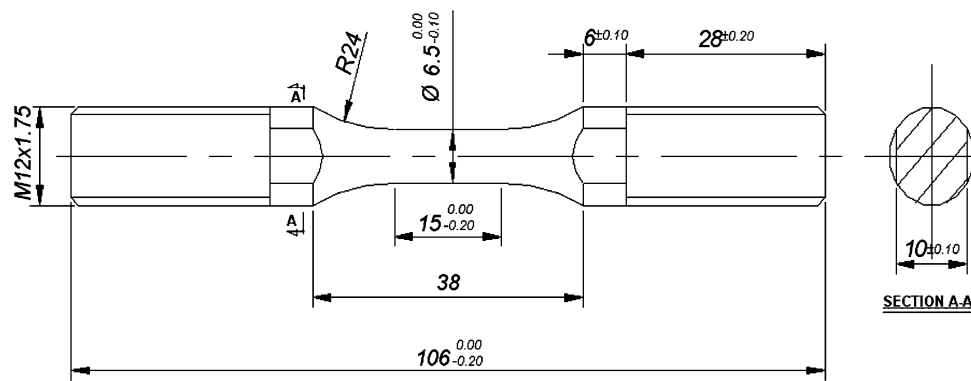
Schematic drawing of the specimen for the test of thermomechanical fatigue, in mm
